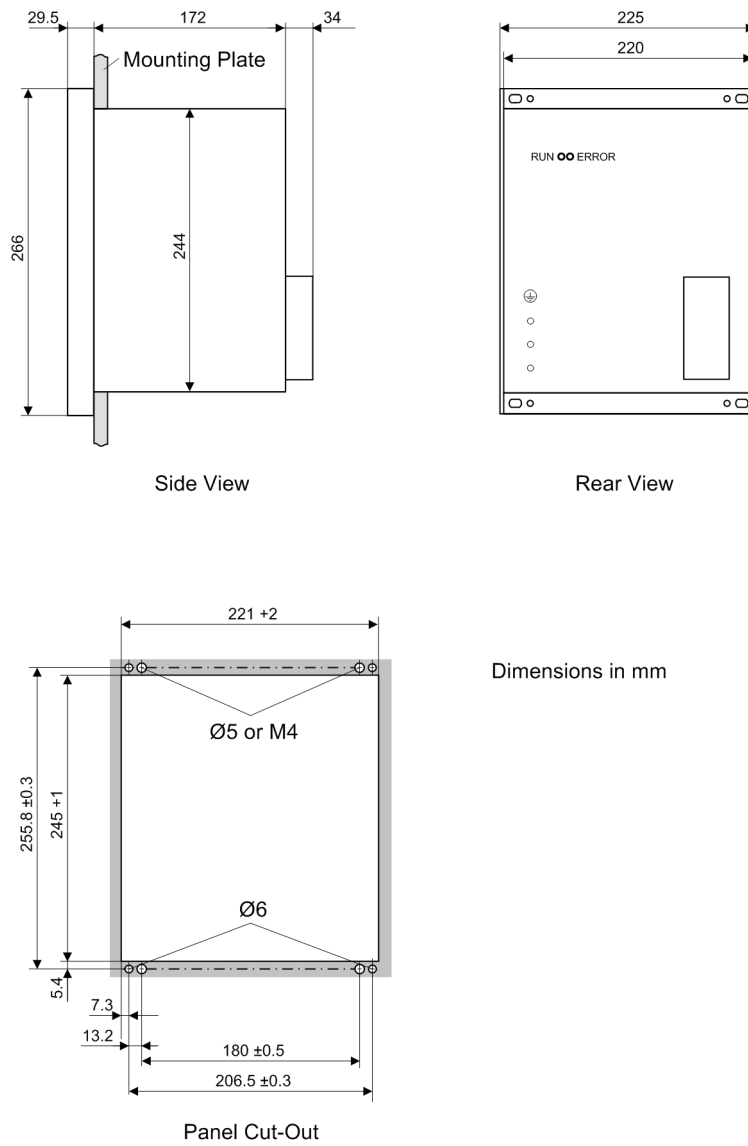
Dimensions of 20 Hz Generator 7XT3300-0BA00 for Panel Surface Mounting
